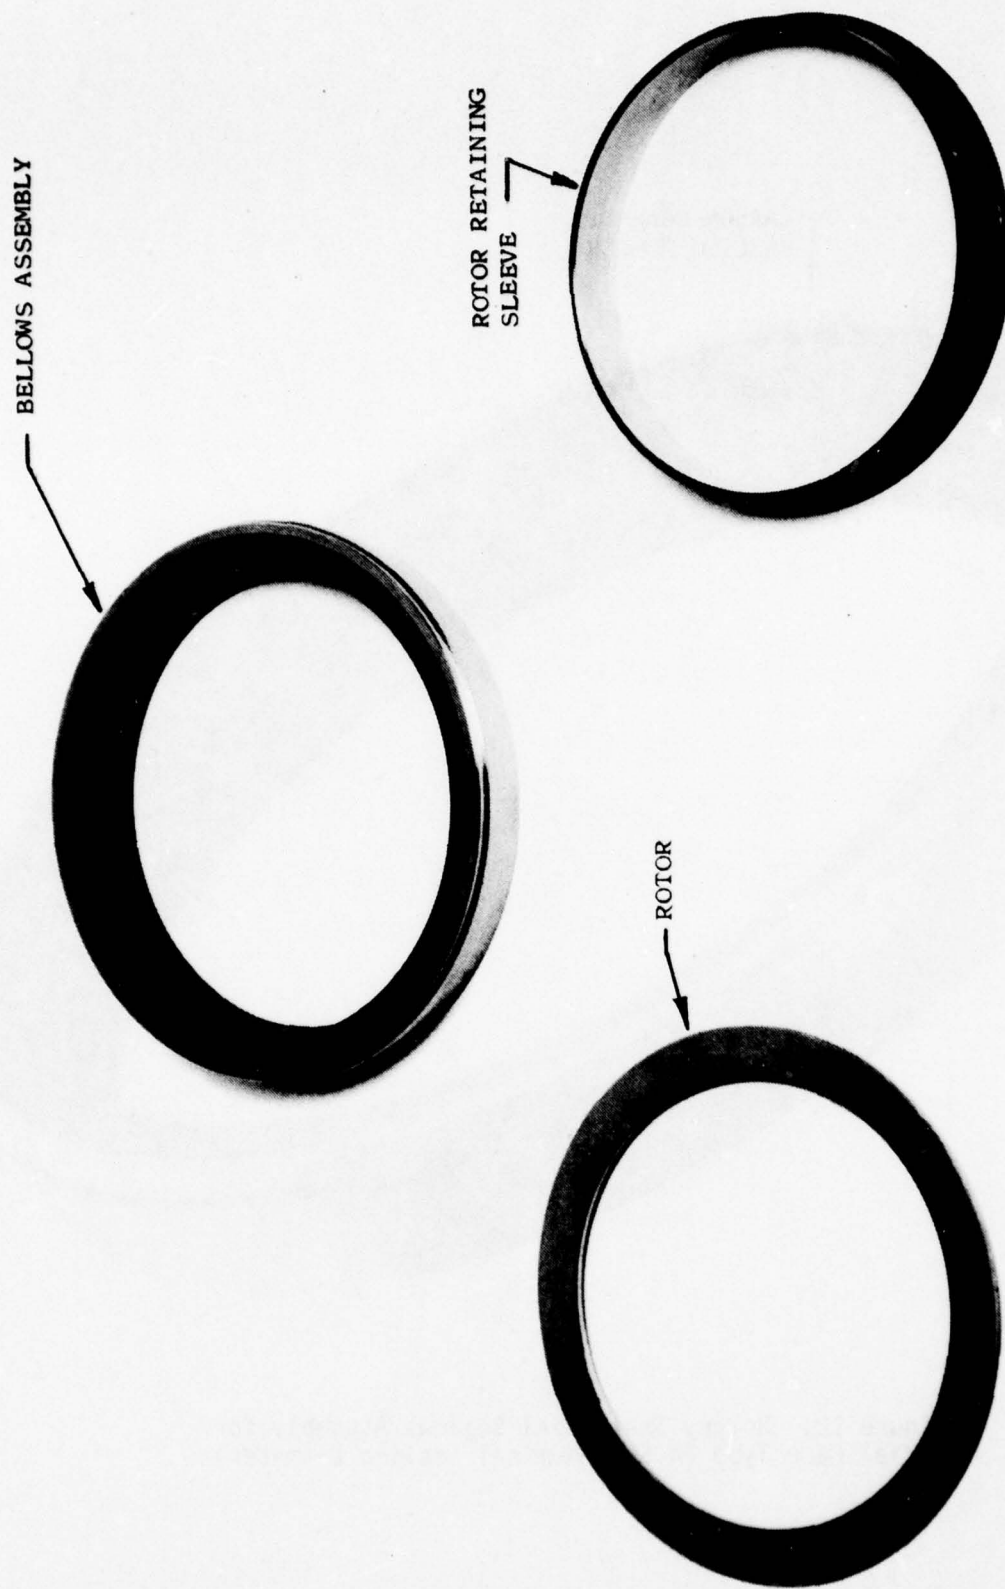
Rotary Shaft Seal Components of Radial Face Type
